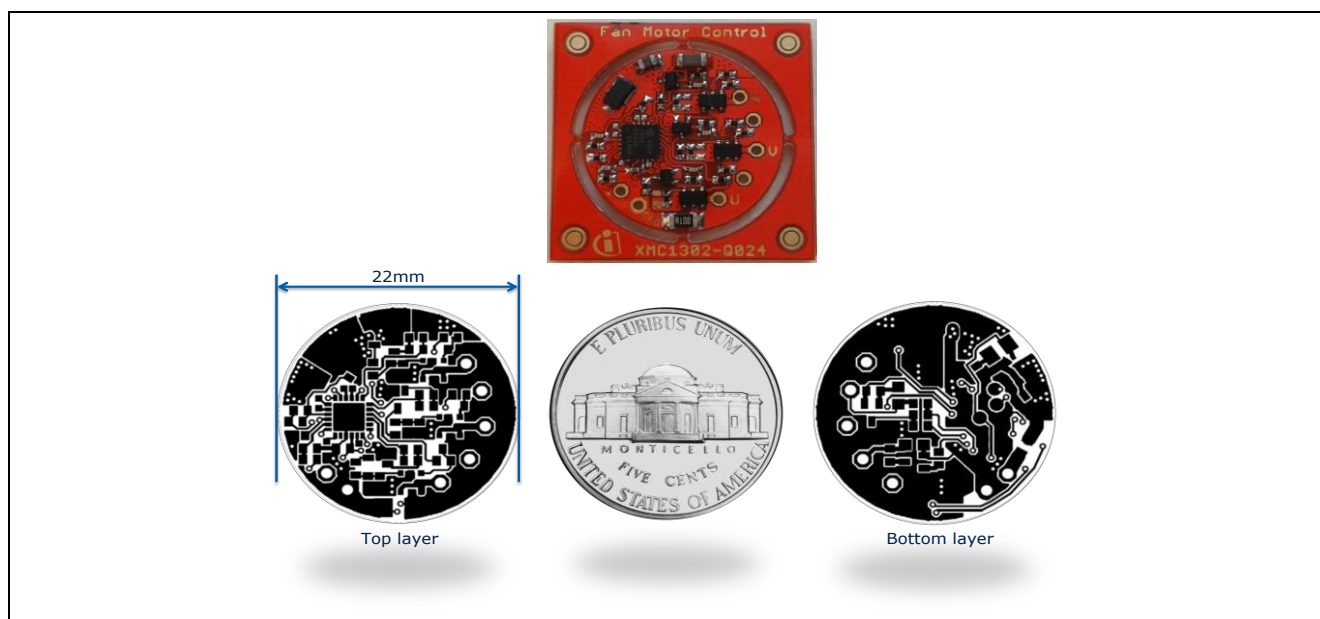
Diameter 22 mm with 2 layer Circular PCB layout
